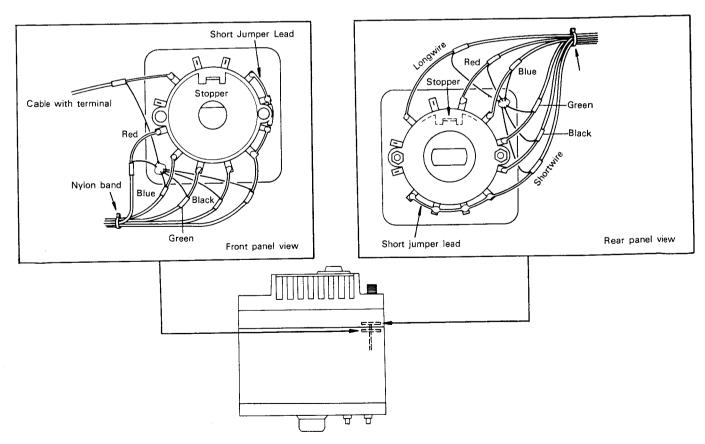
BAND rotary switch (S01-2417-05) wiring.
